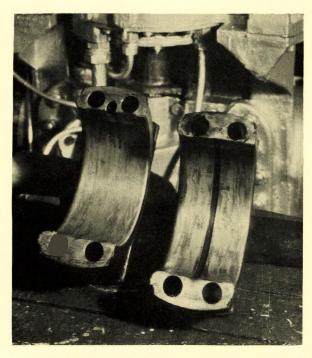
Diesel generator in s.s. Neleus: view of bottom end as removed after 4,596 hours' service
